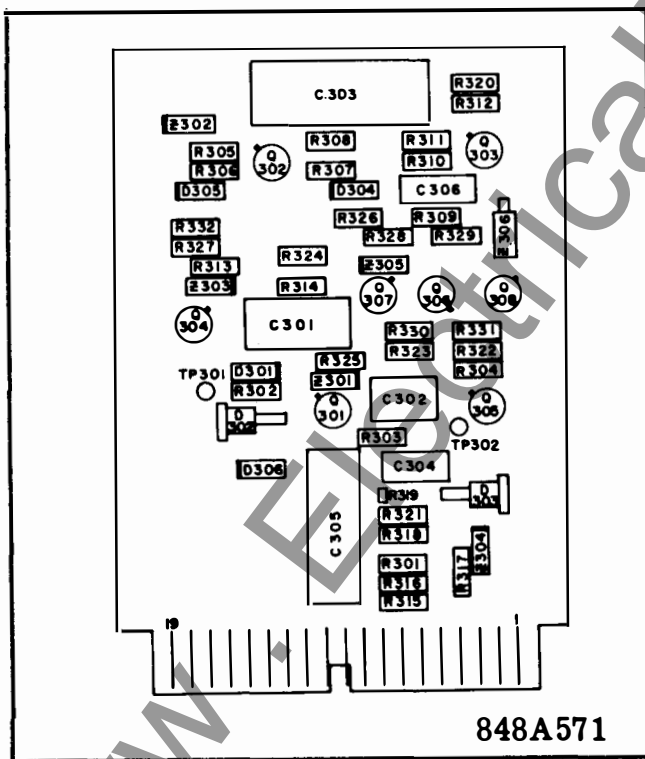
Component Location on Output Printed Circuit Board for Type SKBU Relay.
